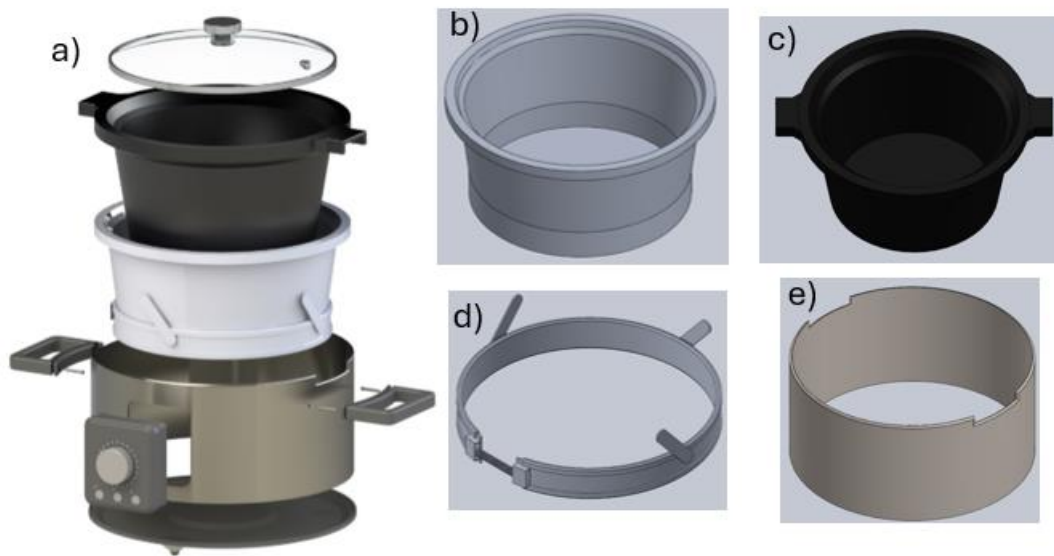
a) Exploded view of the slow cooker showing all components. b) Aluminium cooking pot. c) ceramic cooking pot. d) Mica heating ring. e) outer casing
